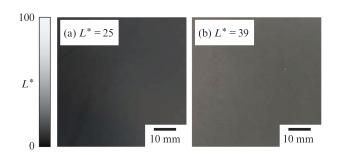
Surface appearances and *L*^{*} values of (a) KROJEX[™] and (b) non-pickled conventional hot-rolled steel sheet
